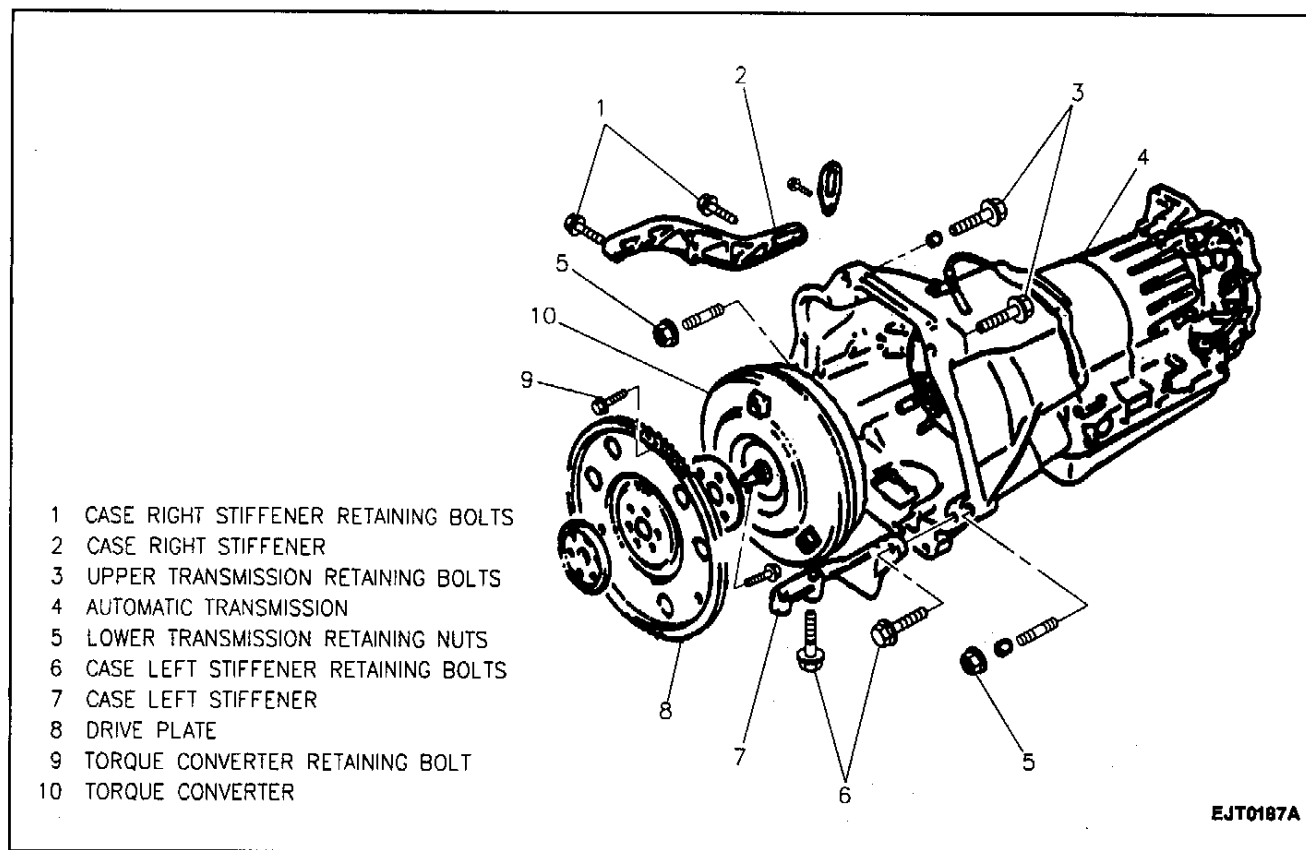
Transmission Attaching Components (03-72LE, 4-Speed)
